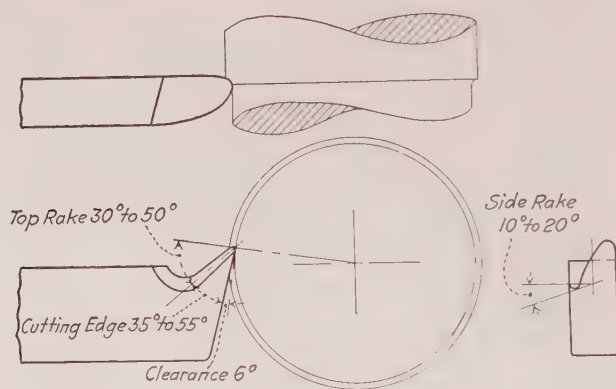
LATHE TOOL THAT MAY BE USED WITH ALUMINUM.
